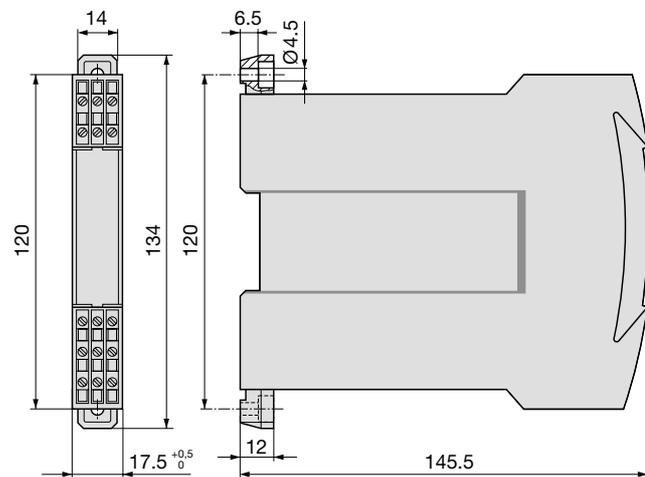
SINEAX TV 808 in housing S17 screw hole mounting brackets pulled out.
